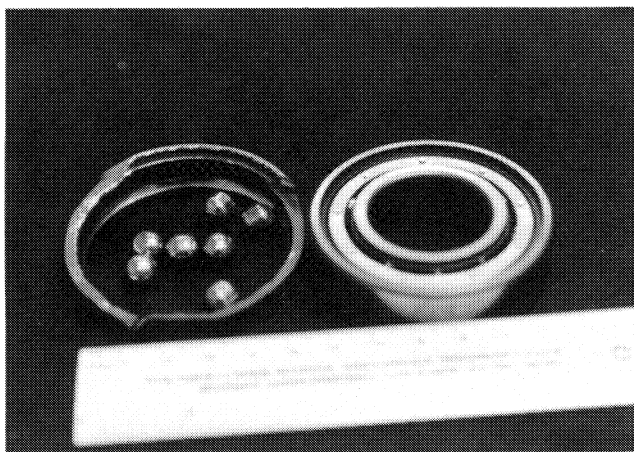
Cracked Upper Bearing Race Along With Physically Intact Lower Bearing. Fractures of This Nature Often Result From Improper Mounting, Insufficient Clearance or Shock Loads.
